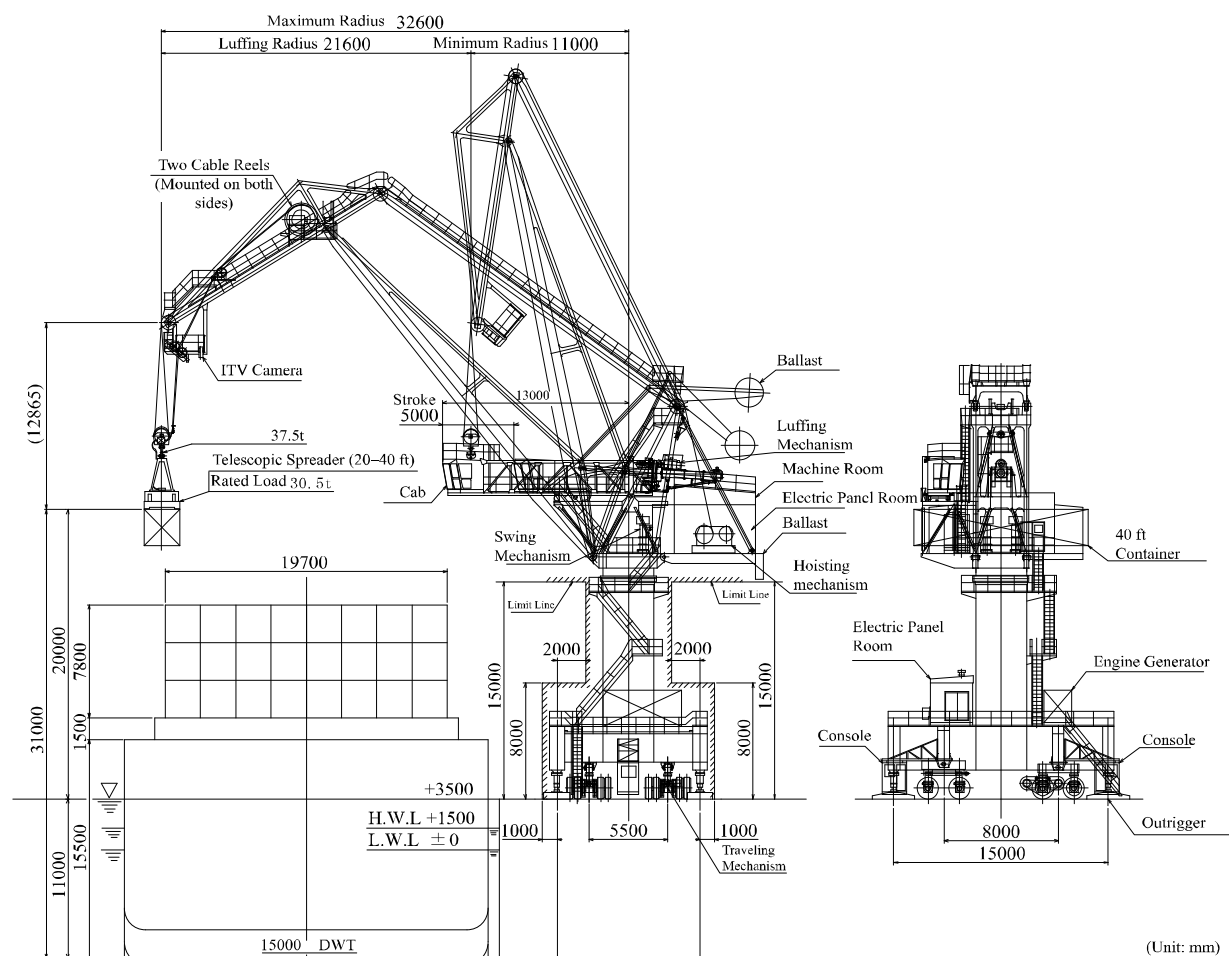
Example of a Tire-Mounted Multipurpose Jib Crane
